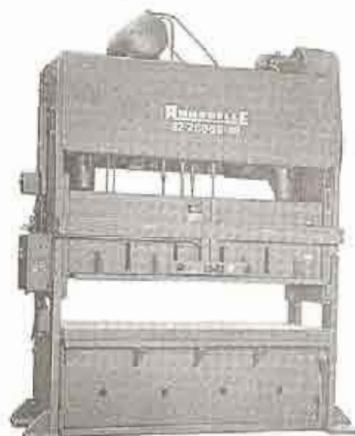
A 200-ton (1800-kN) straight-sided press. (Courtesy of Rousselle Corporation, West Chicago, IL.)
